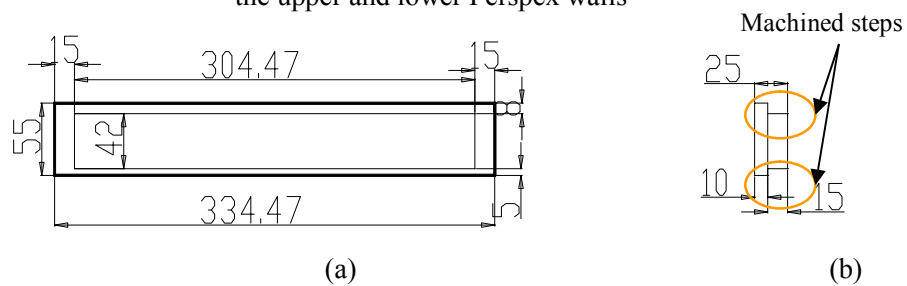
(a) Detailed plan view of the Perspex side wall (b) Detailed side view of the Perspex side walls
